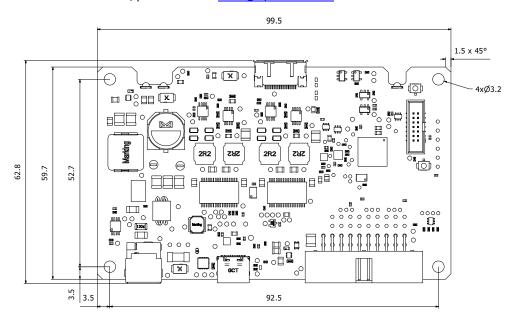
Mechanical drawing of the MR-E-3 base unit board (unit: mm).
